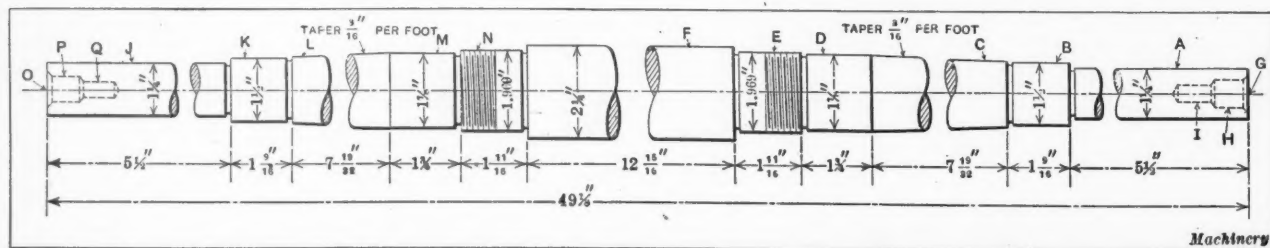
Long Steel Spindle machined from Bar Stock on No. 2-B Universal Turret Lathes
